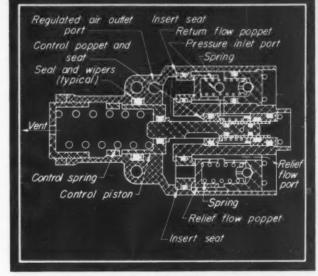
Above — Weston adjustable pneumatic pressure regulator using optically flat plate poppet
